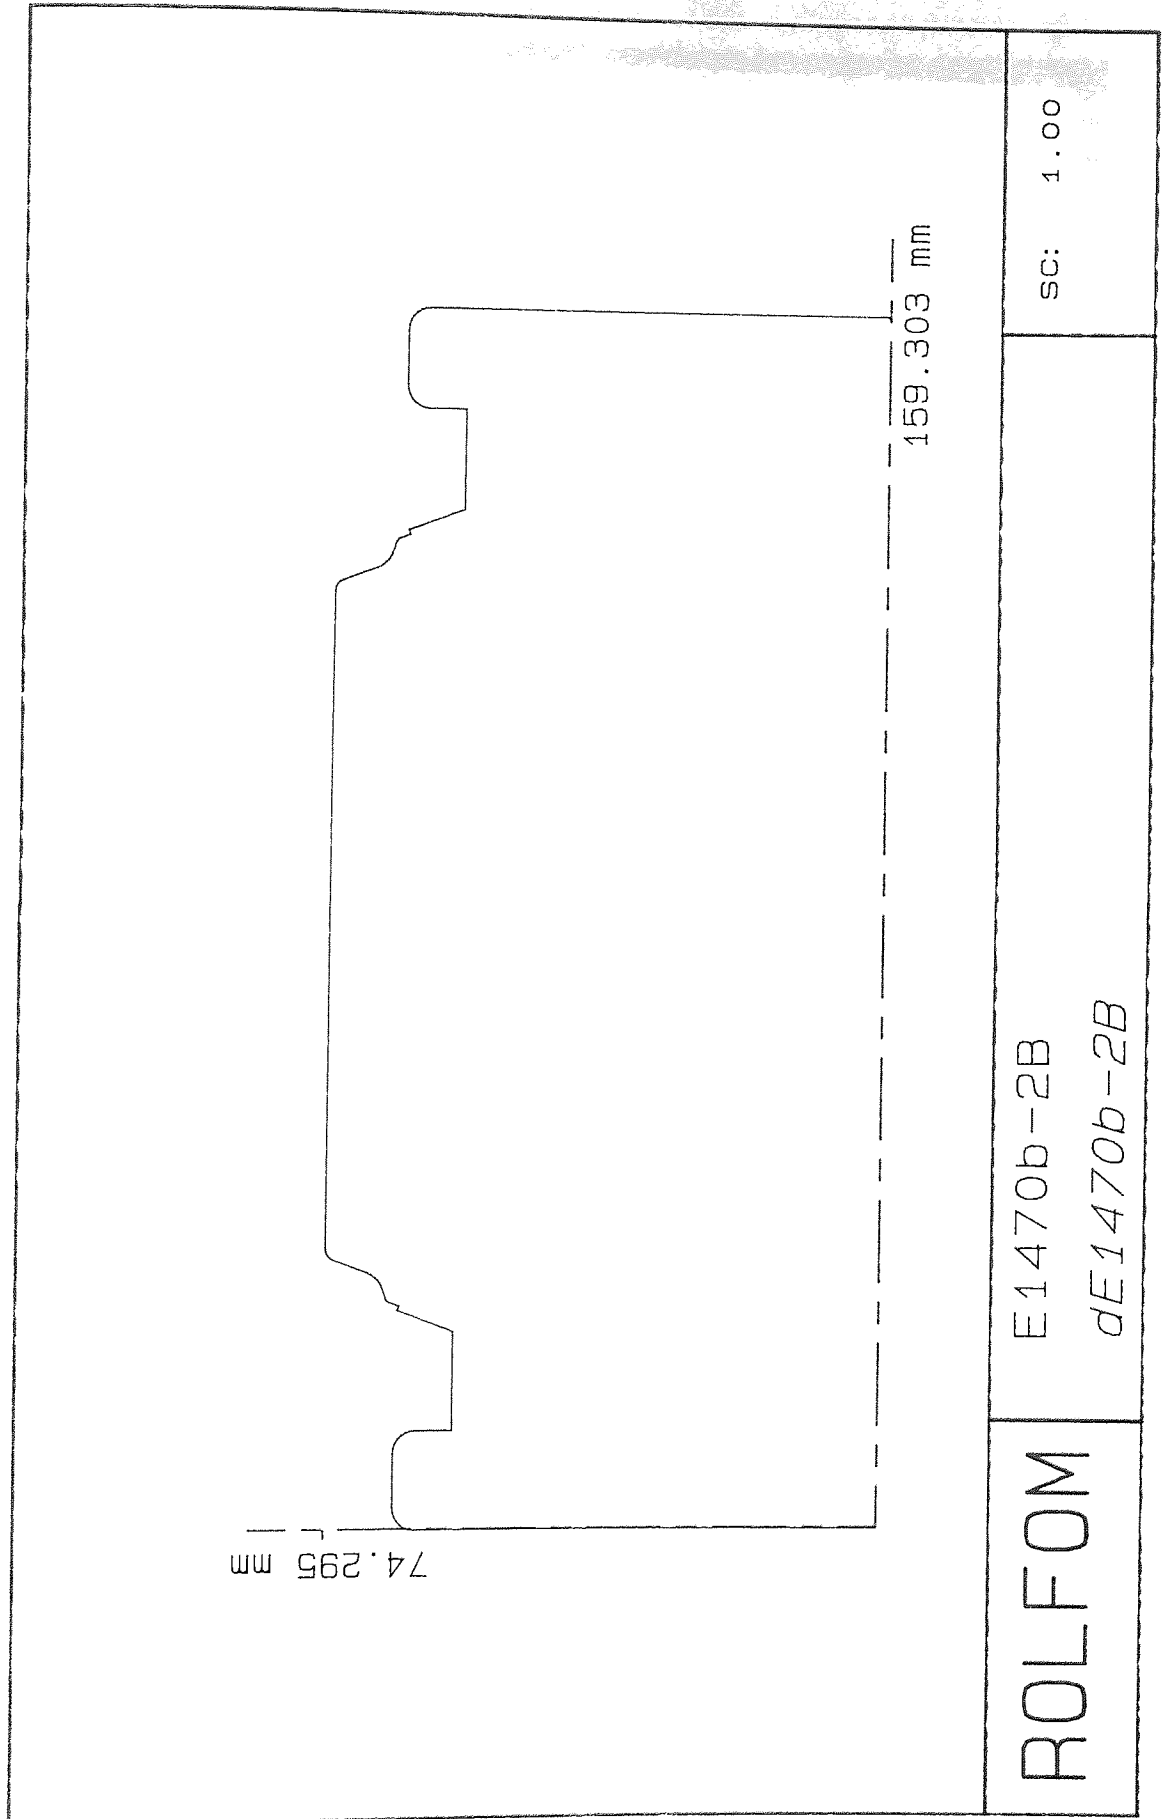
A ROLL DRAWING (b) BOTTOM ROLL
